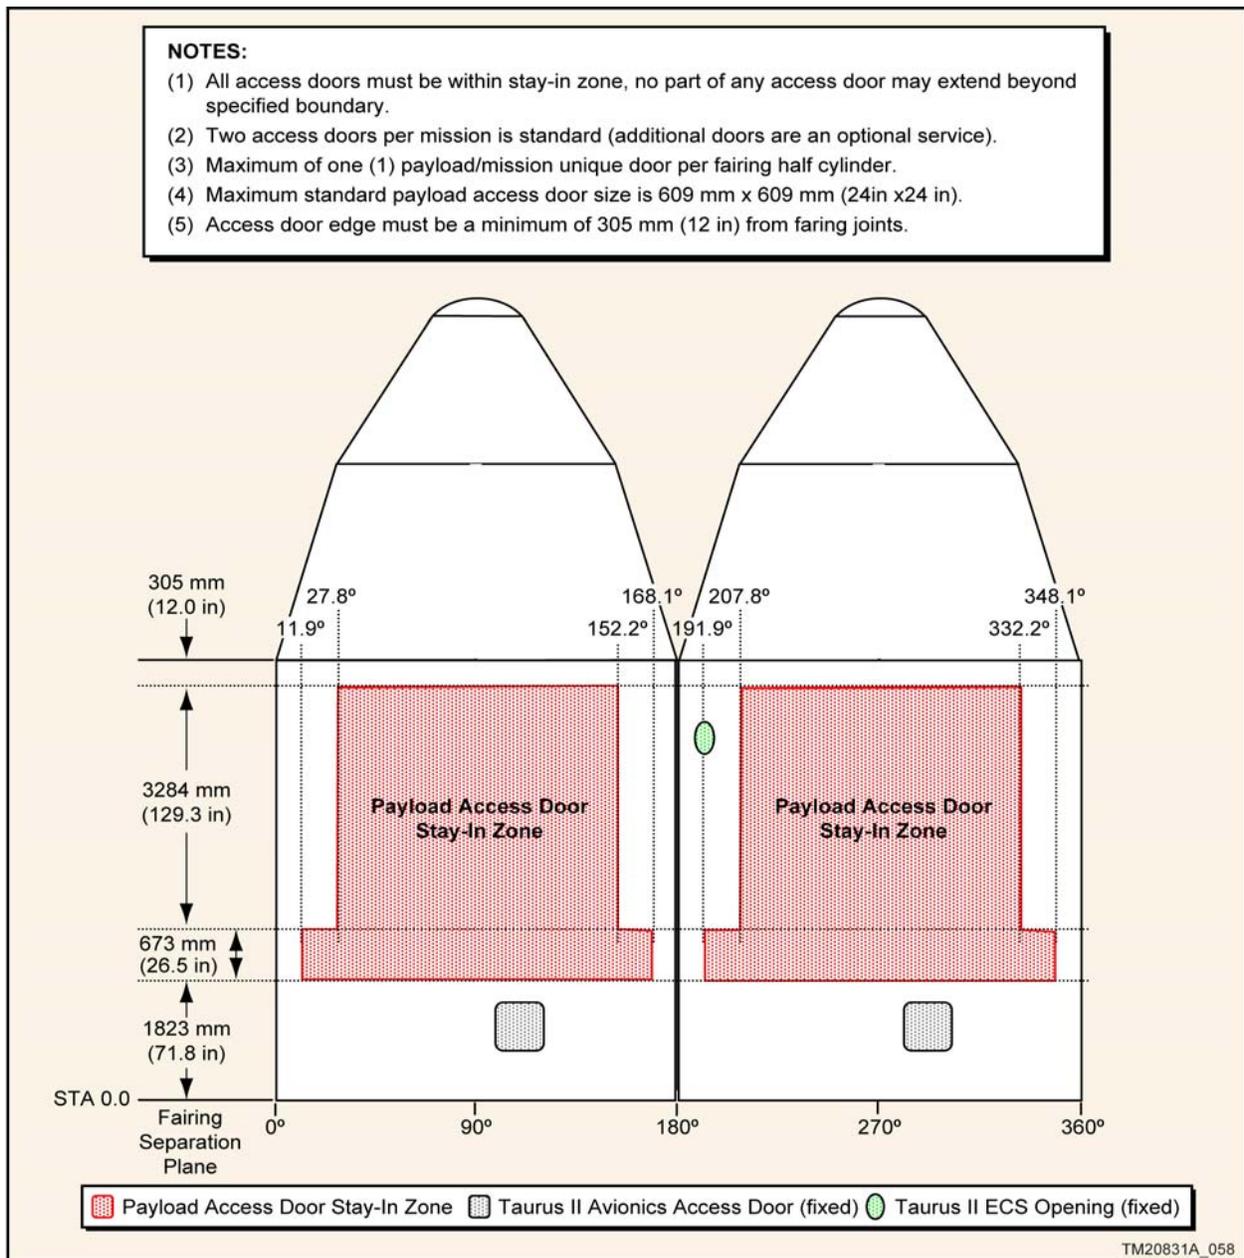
Taurus II Fairing Access Door Placement
